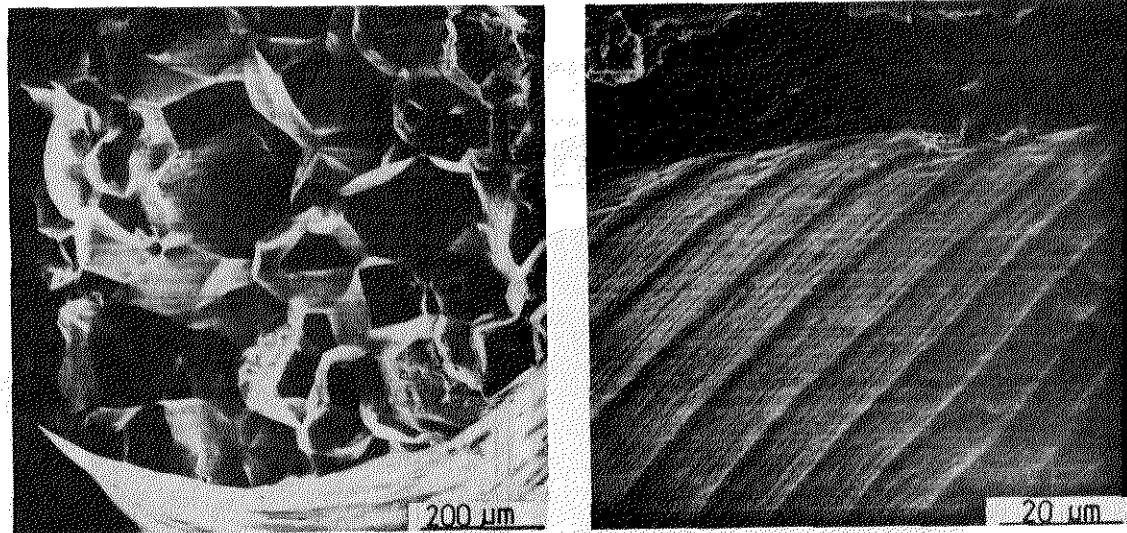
Fatigue fracture surface of 99.99% Ni tested in hydrogen.
